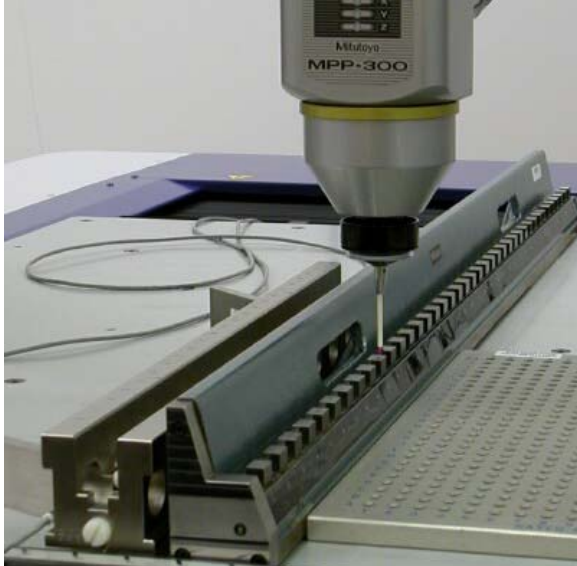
Setup for the calibration of the step gage as part of the intercomparison with NIST. The shorter Koba gage on the left is being calibrated. The Mitutoyo step gage on the right is a check standard.
